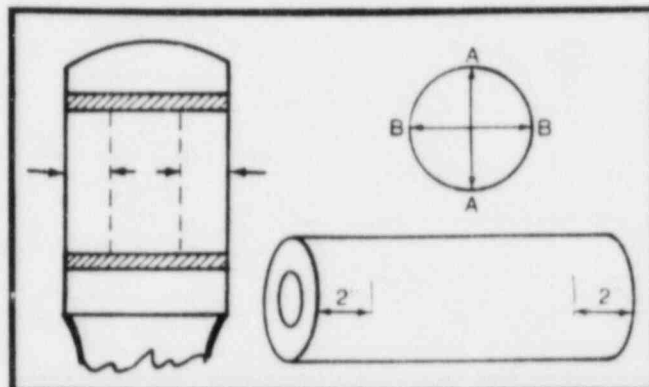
C-6. Measuring Piston Pin In Bushing Clearances
